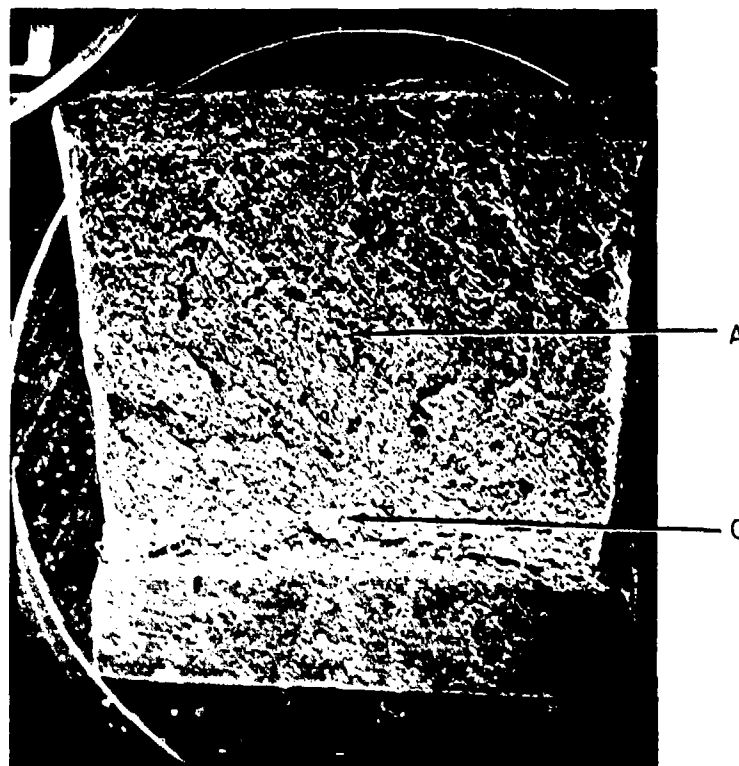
Fracture surface of an A-36 Charpy specimen tested at -18°C , 7x.
